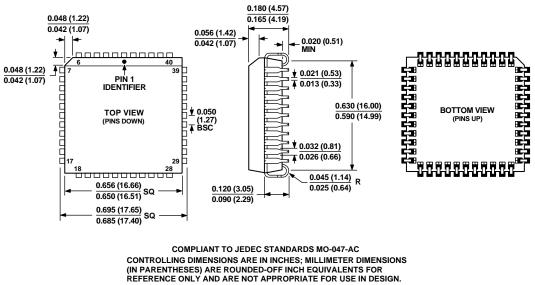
44-Lead Plastic Leaded Chip Carrier [PLCC] (P-44A) Dimensions shown in inches and (millimeters)
